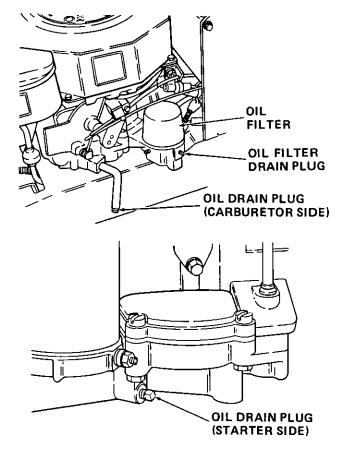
Oil Drain Plugs, Oil Filter, and Oil Filter Drain Plug
